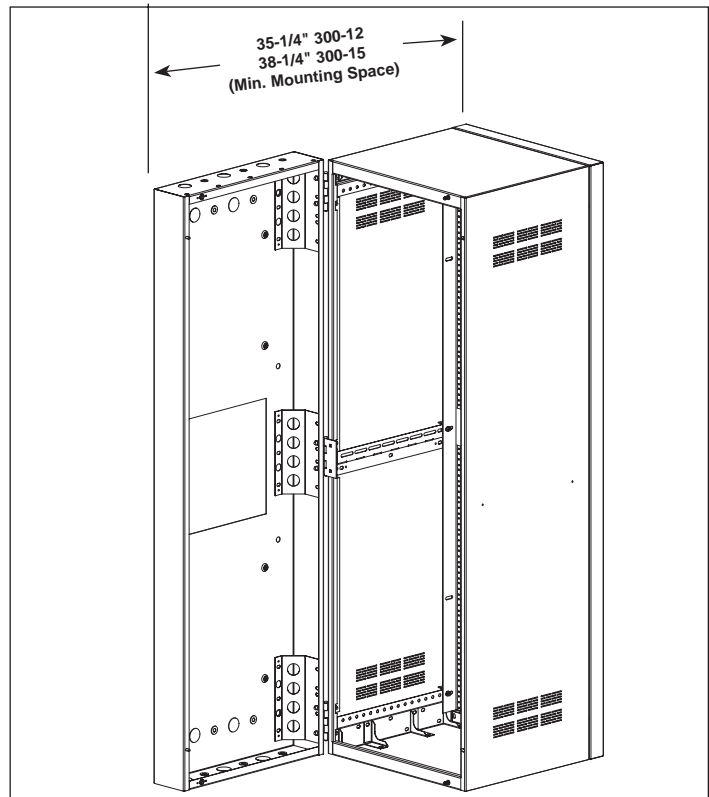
Minimum mounting space required to facilitate opening center section 90° with front door closed.
